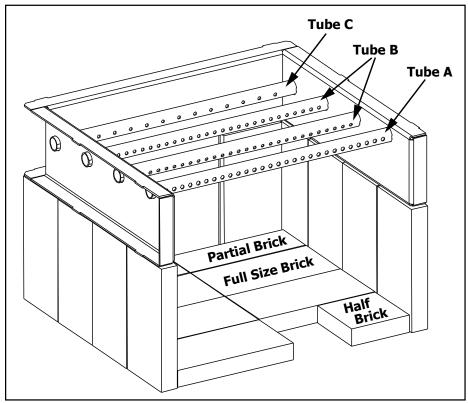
Brick Placement for 1700 shown with Secondary Air Channel and Tubes.
